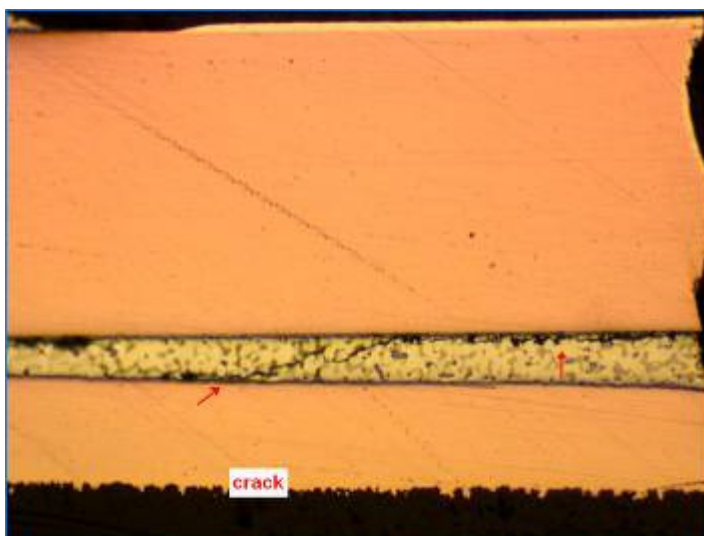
cross section, SN61, U28, left lead solder crack, 200x b
